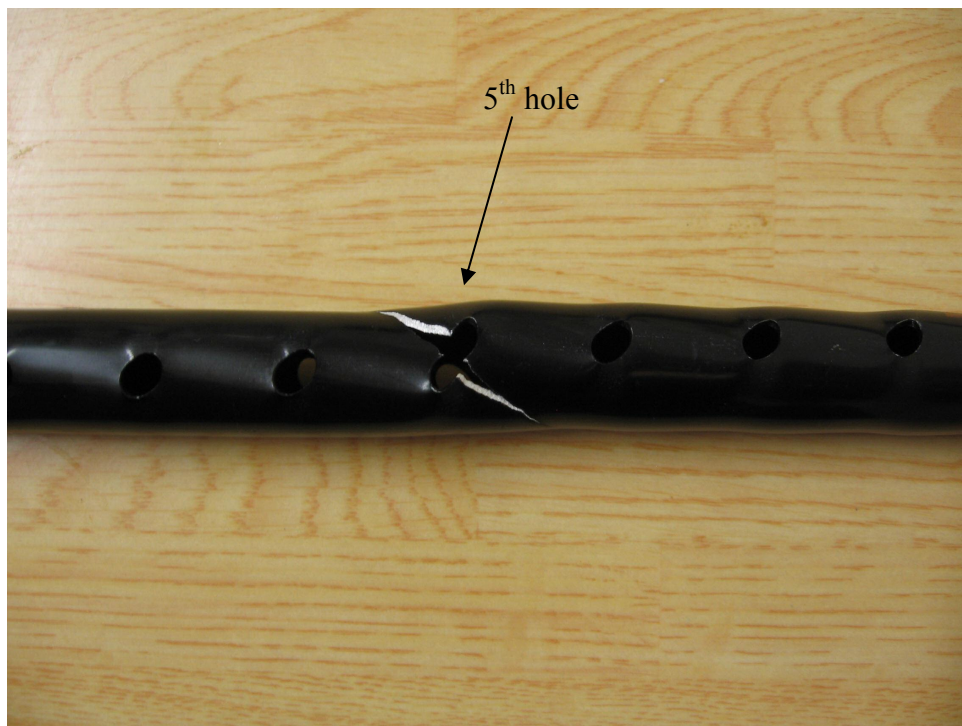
Fracture surface of test specimen 2 (Figure 3.19), fractured at 200 degrees/min.
